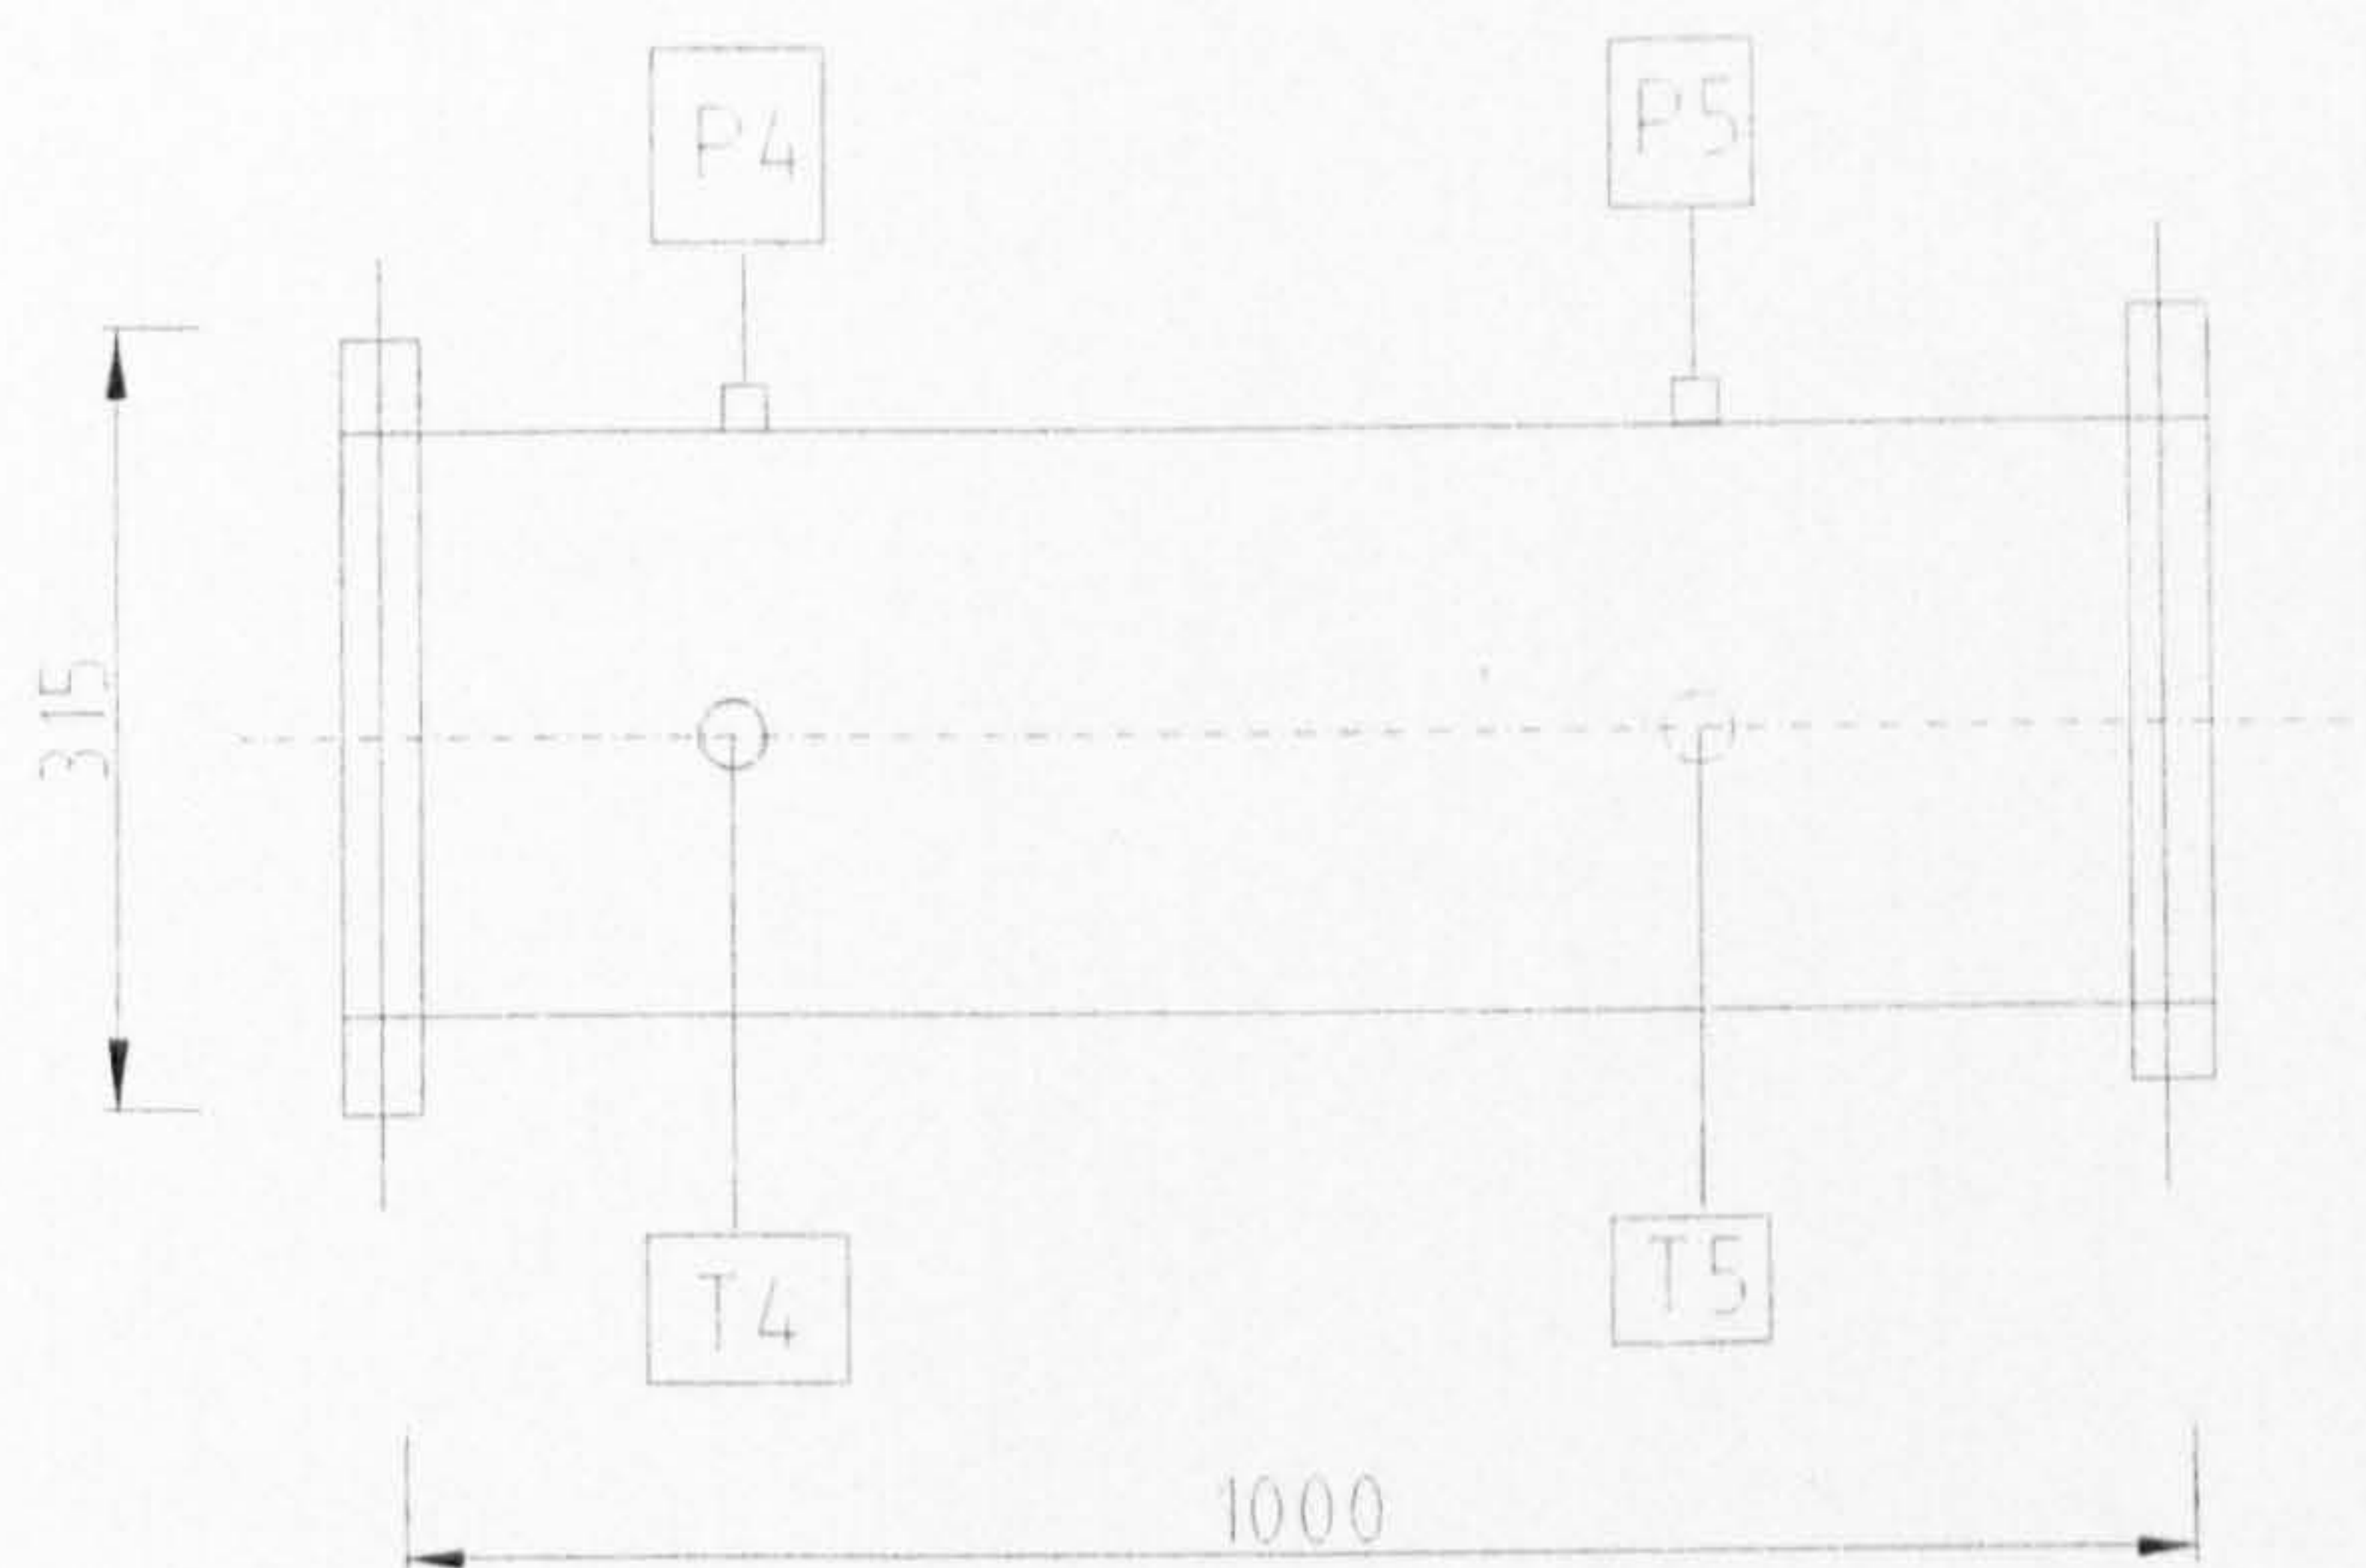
Scaled drawing of pipe section for Test vessel3.
